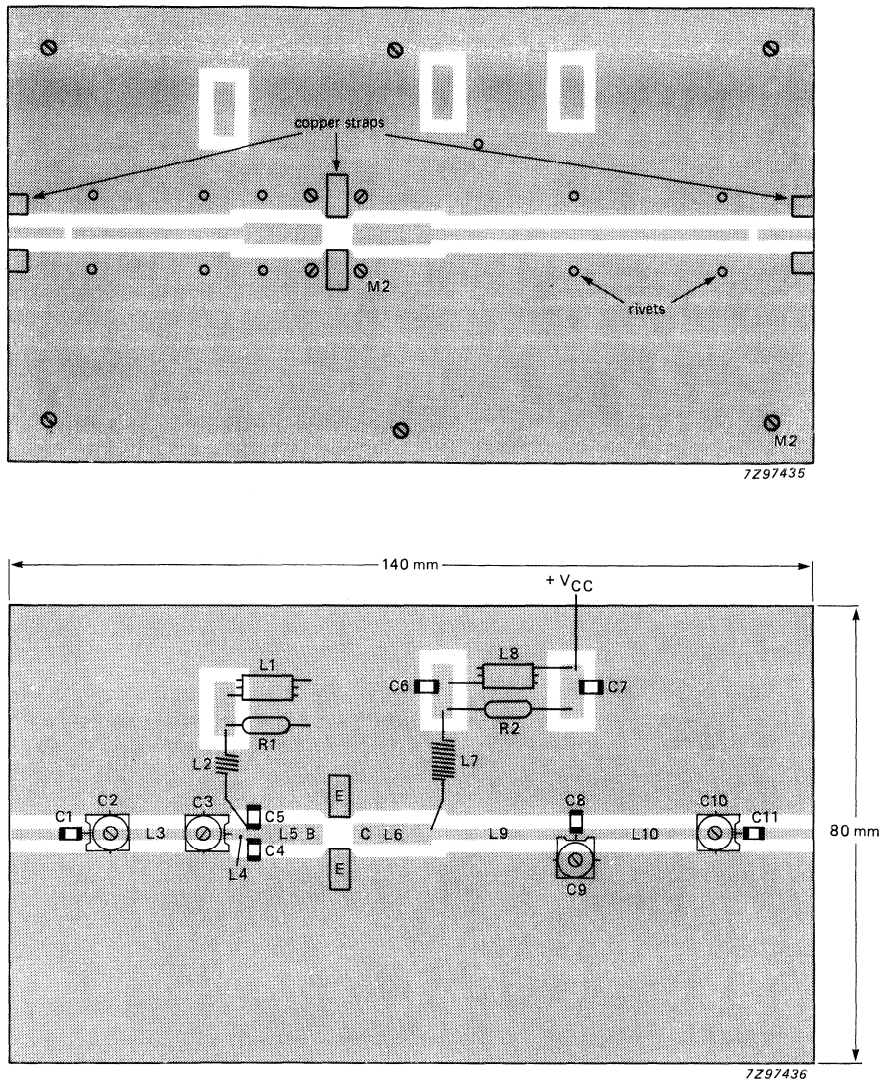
Printed-circuit board and component lay-out for 900 MHz class-B test circuit.
